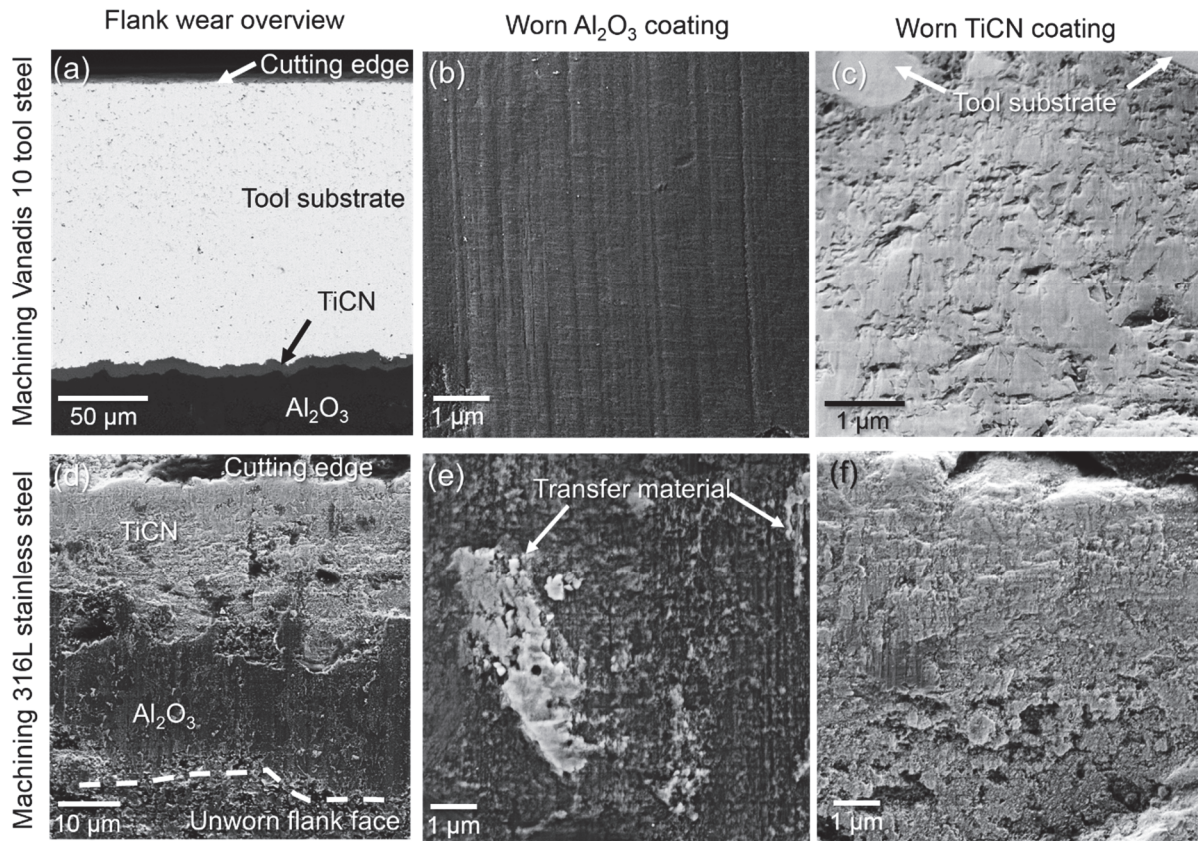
Comparison of wear features on the flank surfaces of TiCN- Al_2O_3 coated cemented carbide tools after machining the tool steel and stainless steel. The tool steel was machined with $v_c=80$ m/min and $f=0.05$ mm/rev and the stainless steel was machined with $v_c=160$ m/min and $f=0.08$ mm/rev. The depth of cut was 1 mm in both cases. The presented results were obtained after removal of adhered workpiece material by etching. [82]
